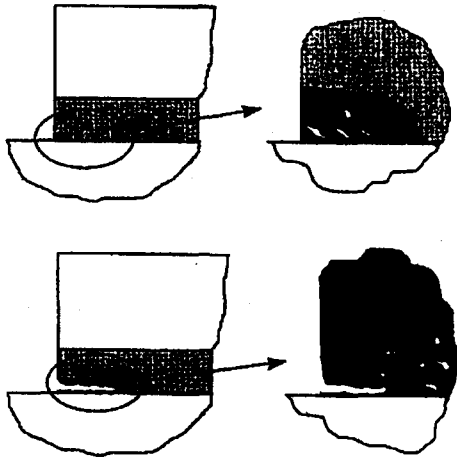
Damage zone model for a bonded joint suffering cohesive failure⁽²⁾
